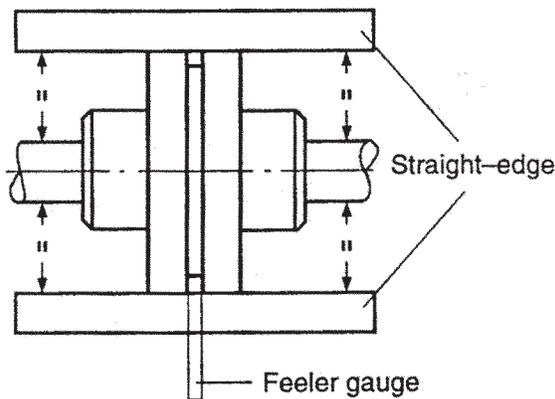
Alignment of the coupling with straight-edge and feeler gauge
